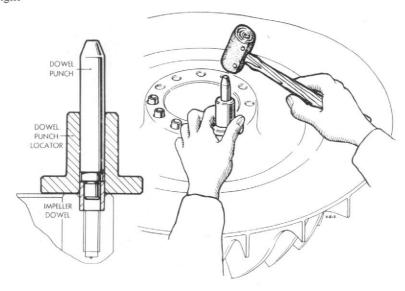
Using dowel punch T.76796, guide T.76797, and a hide-faced hammer to drive the centre shaft dowels into the impeller.
